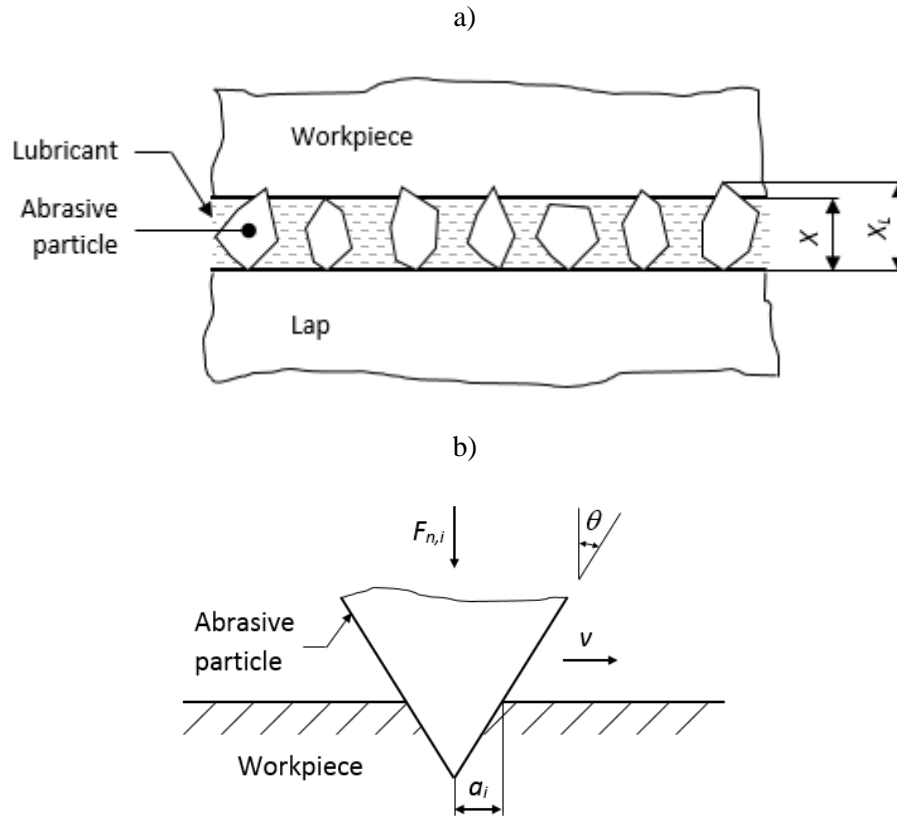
Schematic drawing of abrasive-workpiece contact during lapping (a) with a mechanical model of the contact between an abrasive particle and the workpiece (b); based on [22]
